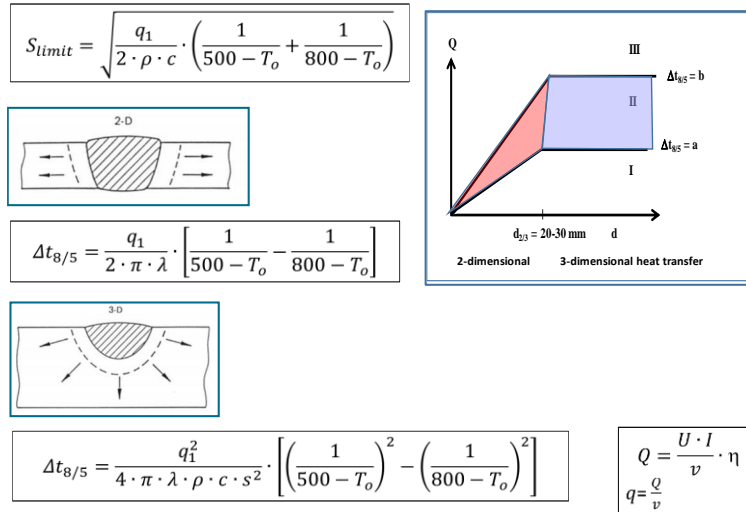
Determination of the limiting thickness between 2-D and 3-D heat transfer during welding
